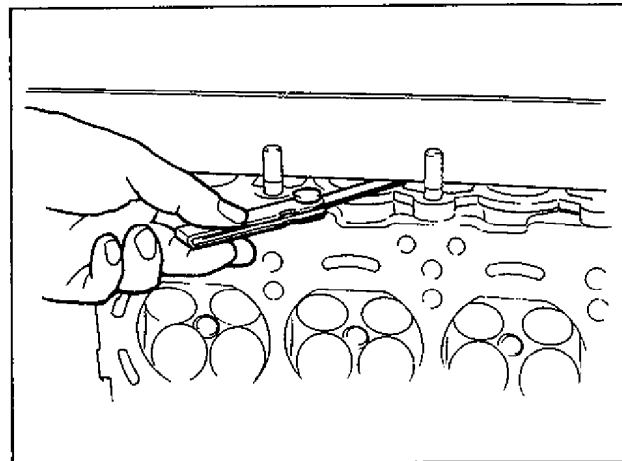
A-93 Measuring Surface of Exhaust Manifold Seating Face
